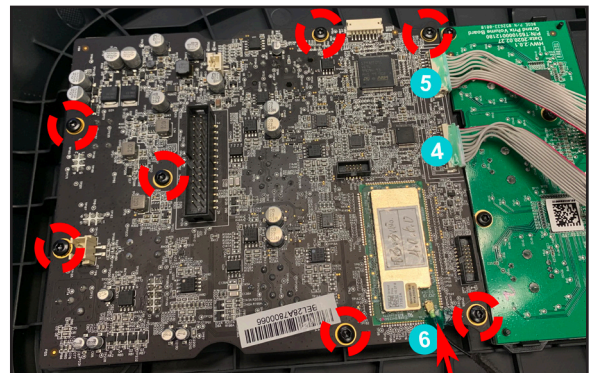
Main-I/O Board Green Adhesive & Screws Removal
